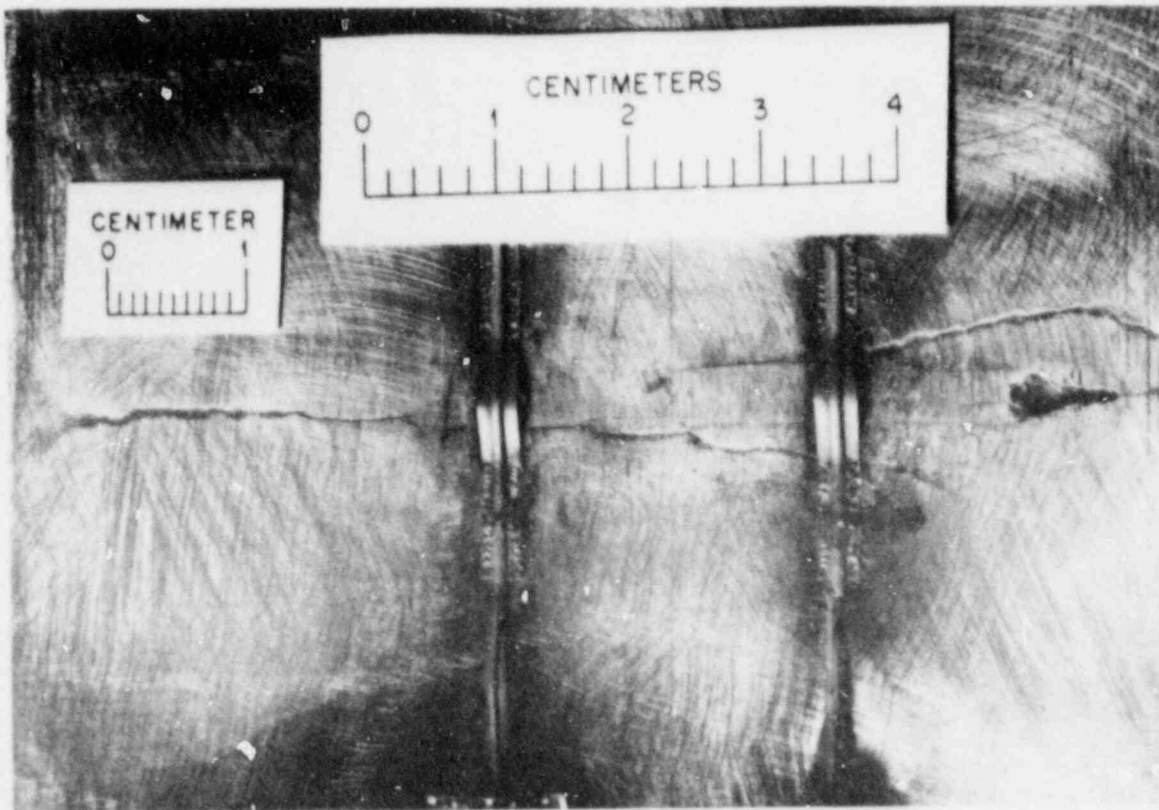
Crack in HAZ of EB weld on surface of plate CP-17.
